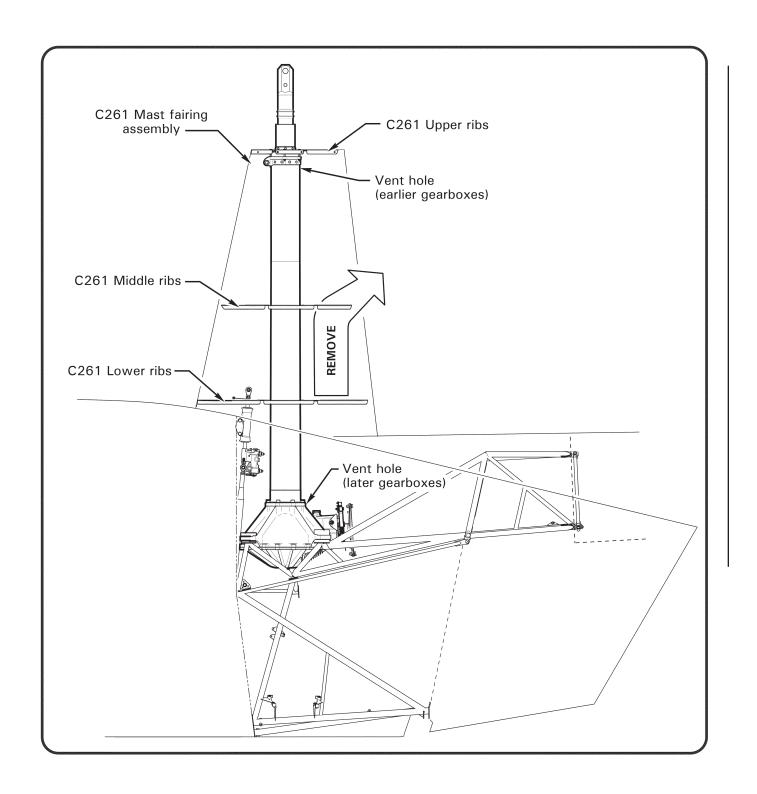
MAIN ROTOR GEARBOX REMOVAL
